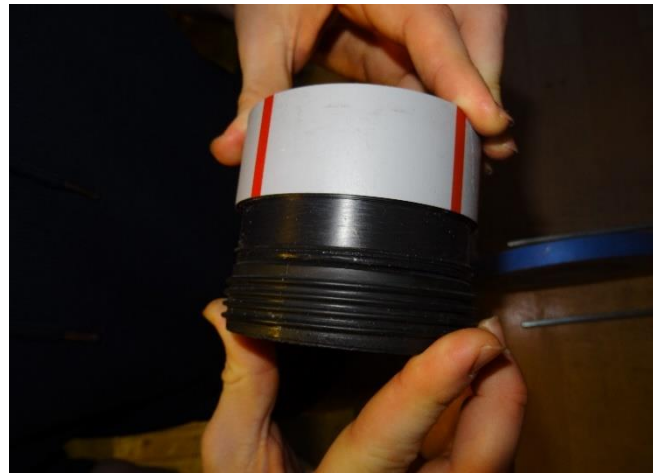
When there is a small bead at the edge of the tube (left) and the thread, the two pieces can gently be pressed together until they hold.
